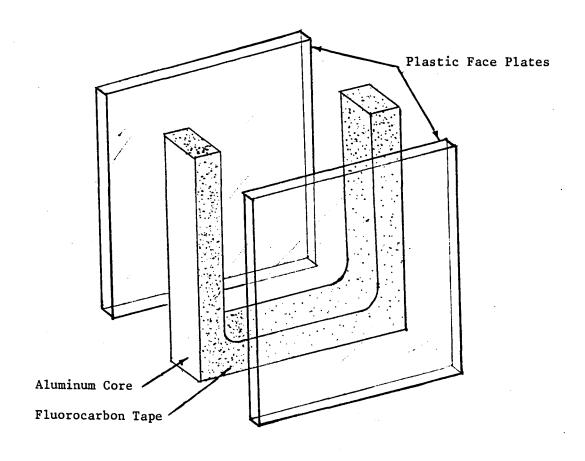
Mold for Scale-Up Tools (Produces 13 x 13 x 1 Inch Tool)
